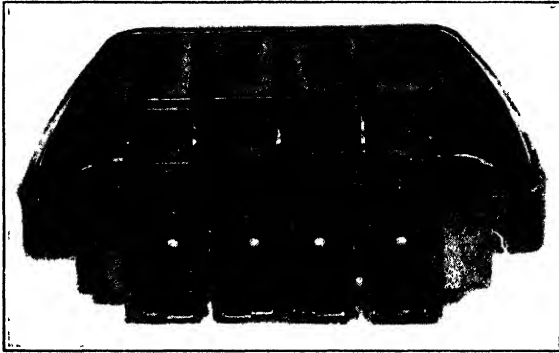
A molded part for electrical control equipment. Note the generous use of fillets and tapers.
